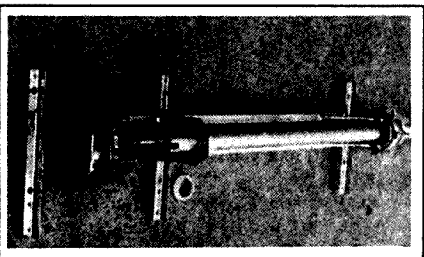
This view shows how the rotator plate is welded to the lower bracket. It is a simple matter to undo the rotator screws and mast clamp and then remove the rotator if needed.
